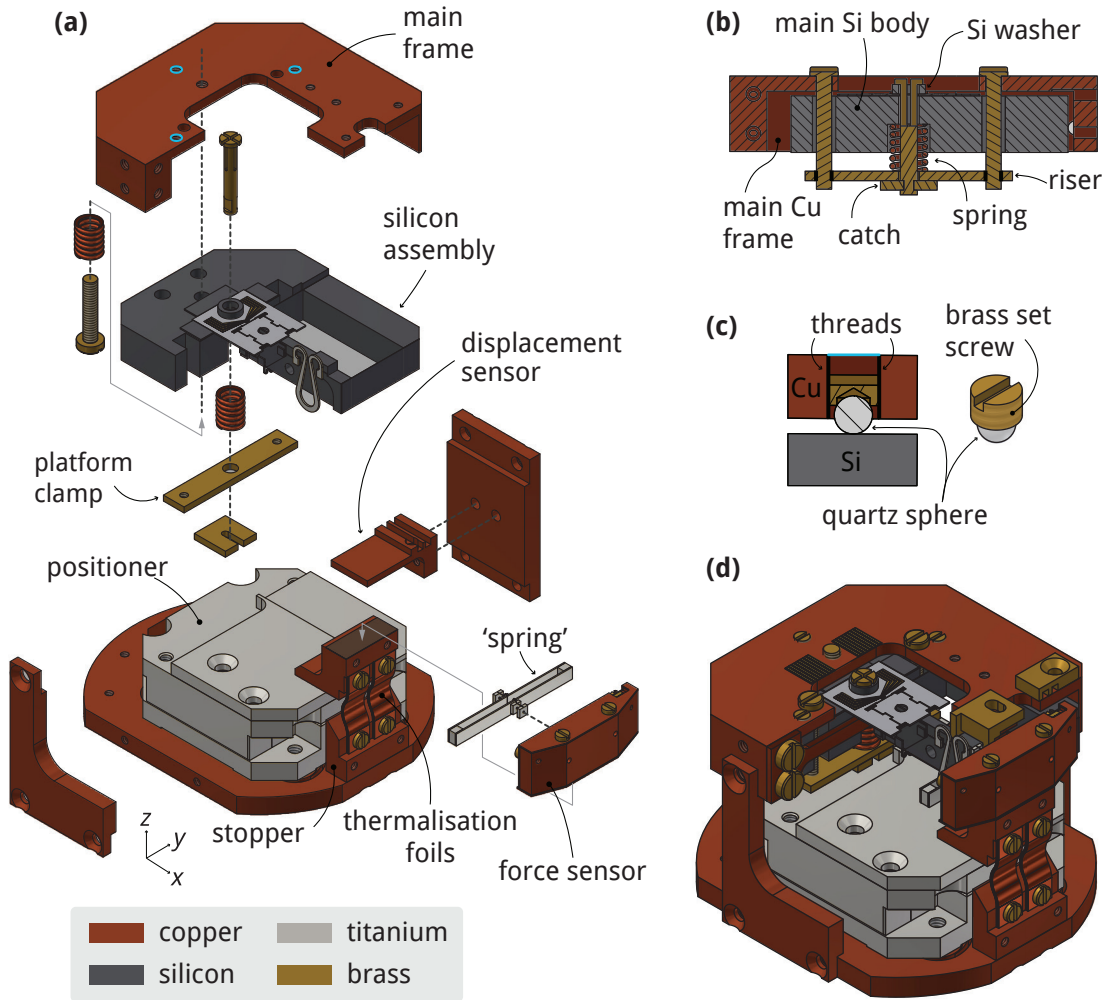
| (a) Expanded view of the housing required to bring the base components together with the silicon assembly. (b) The platform is clamped with a spring-based mechanism compressed with two outer screws, and held in place by a sliding catch. (c) As shown in panel (a), the silicon assembly is pressed towards the main copper frame using a compression spring. Quartz spheres within set screws prohibit contact between these components, minimising friction due to differential thermal contraction, and permitting fine position adjustment. (d) Schematic of the assembled rig in its entirety.
